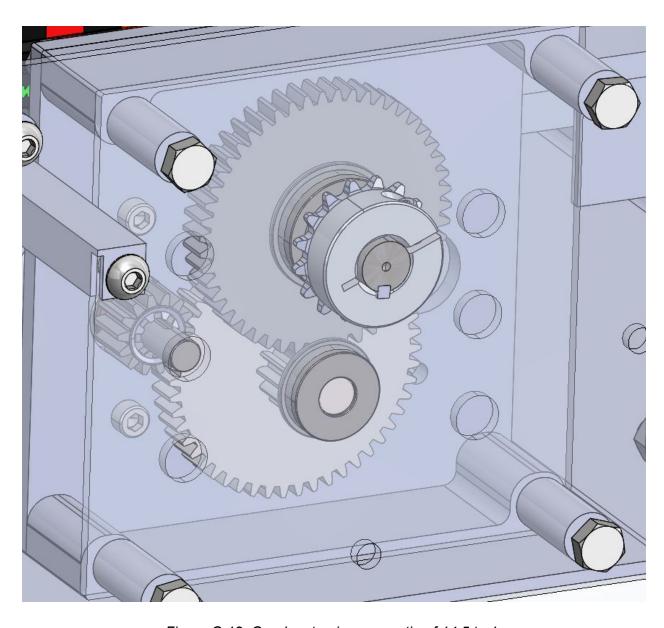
Gearbox to give gear ratio of 14.5 to 1
